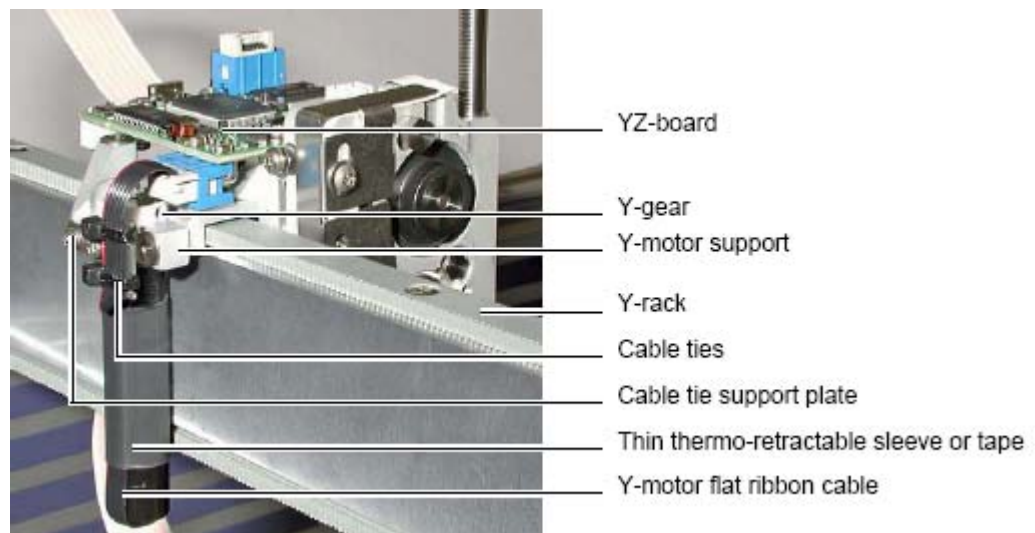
Y-motor assembly with spring-loaded Y-motor support
